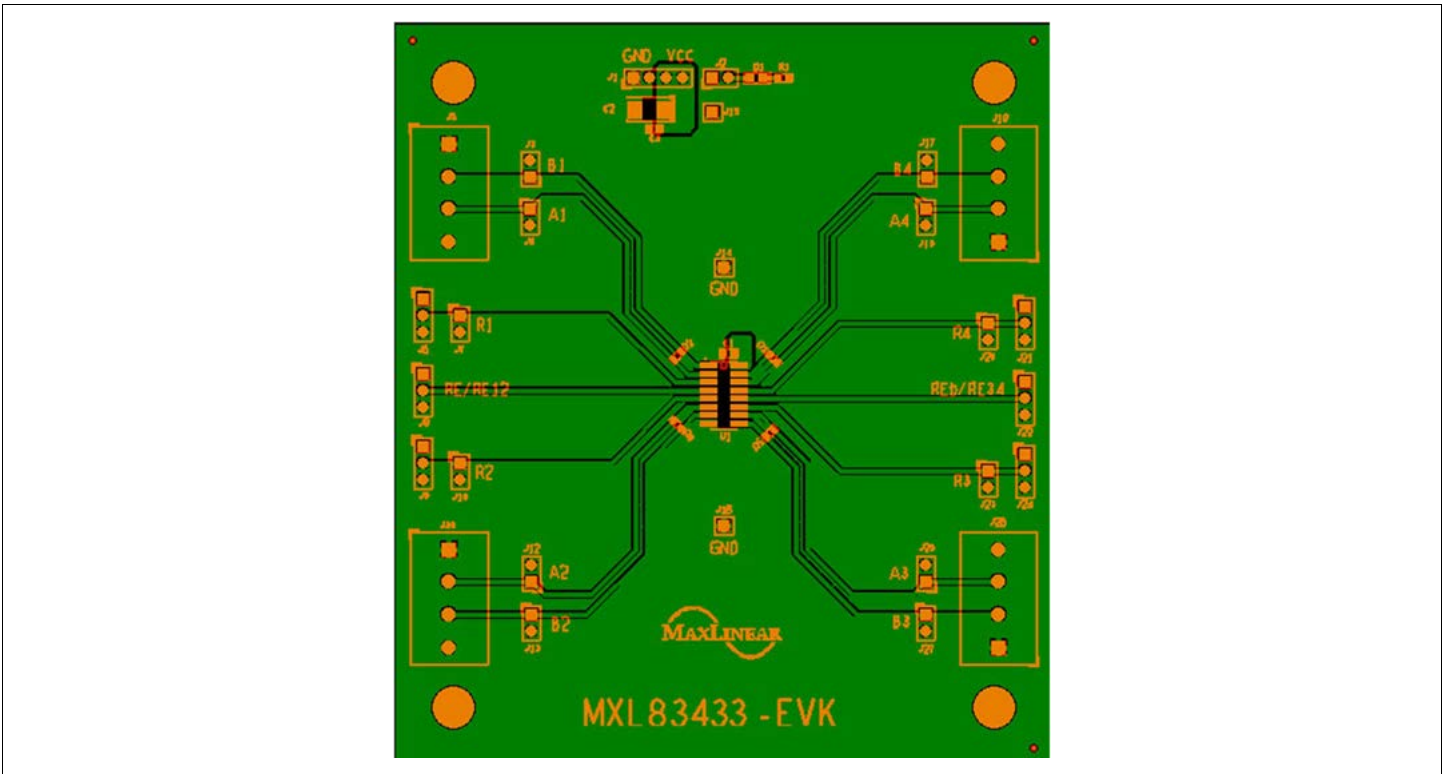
EVK PCB Layer 1—Top View (NSOIC16)
